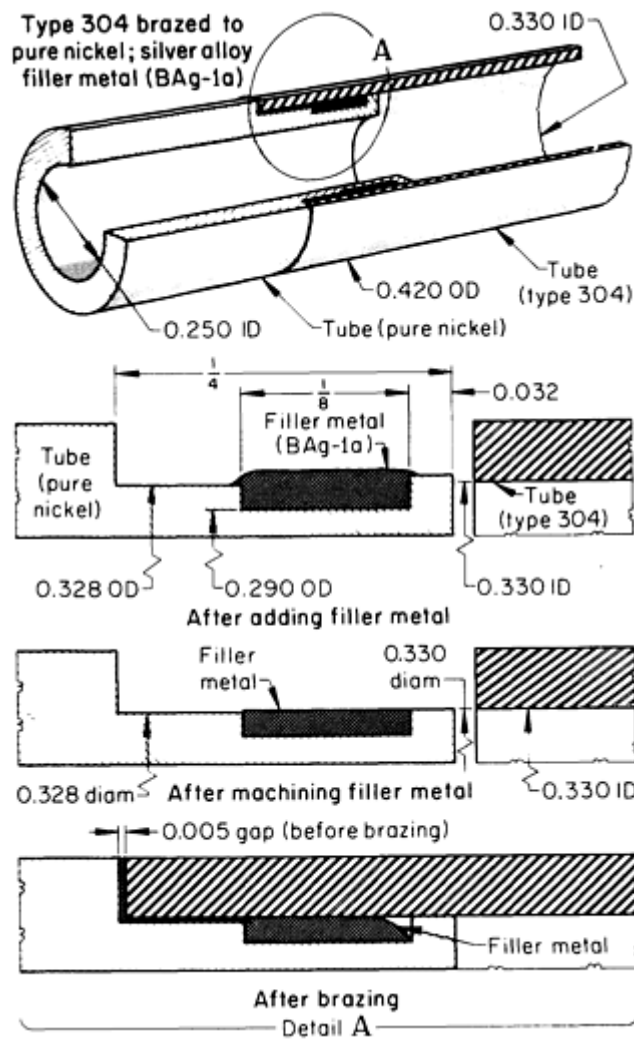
TORCH-BRAZED ASSEMBLY OF A STAINLESS STEEL TUBE AND A PURE NICKEL TUBE
